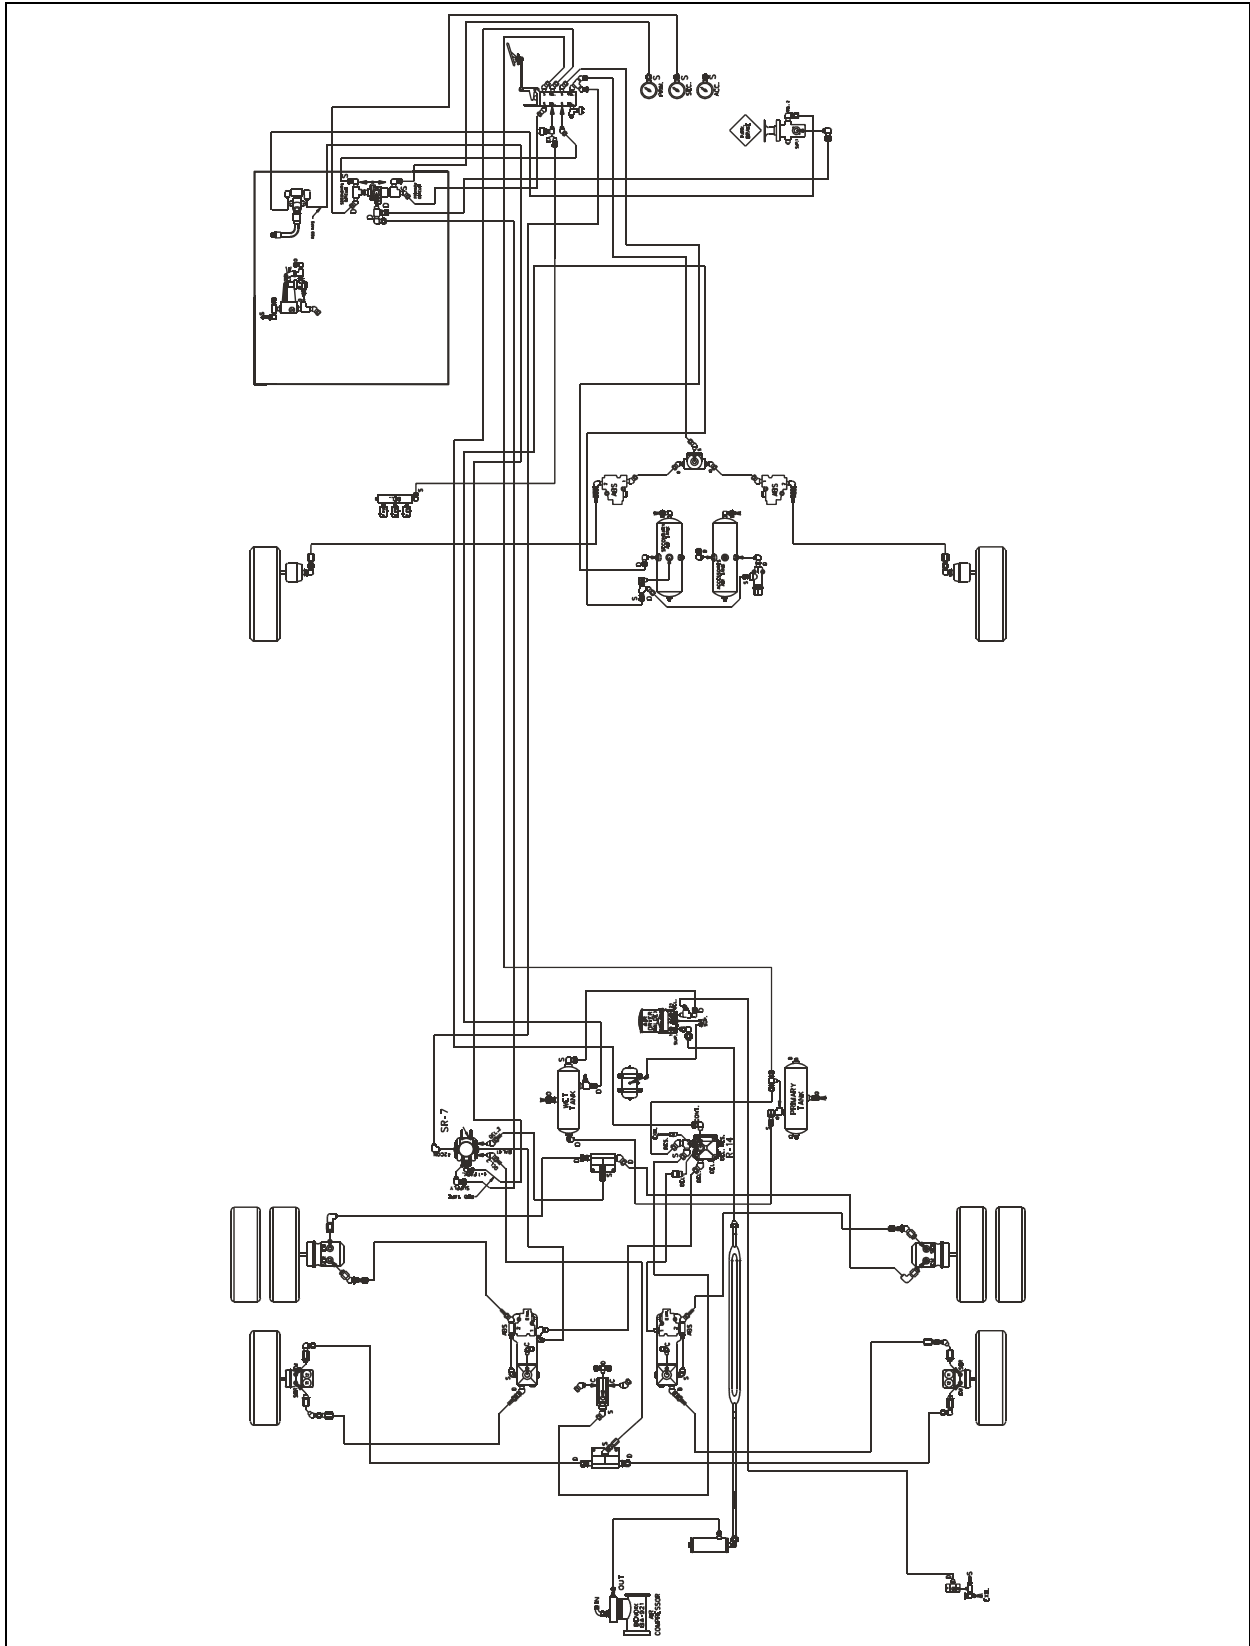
AIR-OPERATED BRAKING SYSTEM FOR X3 COACHES EQUIPPED WITH INDEPENDENT FRONT SUSPENSION ¹²²¹⁶
